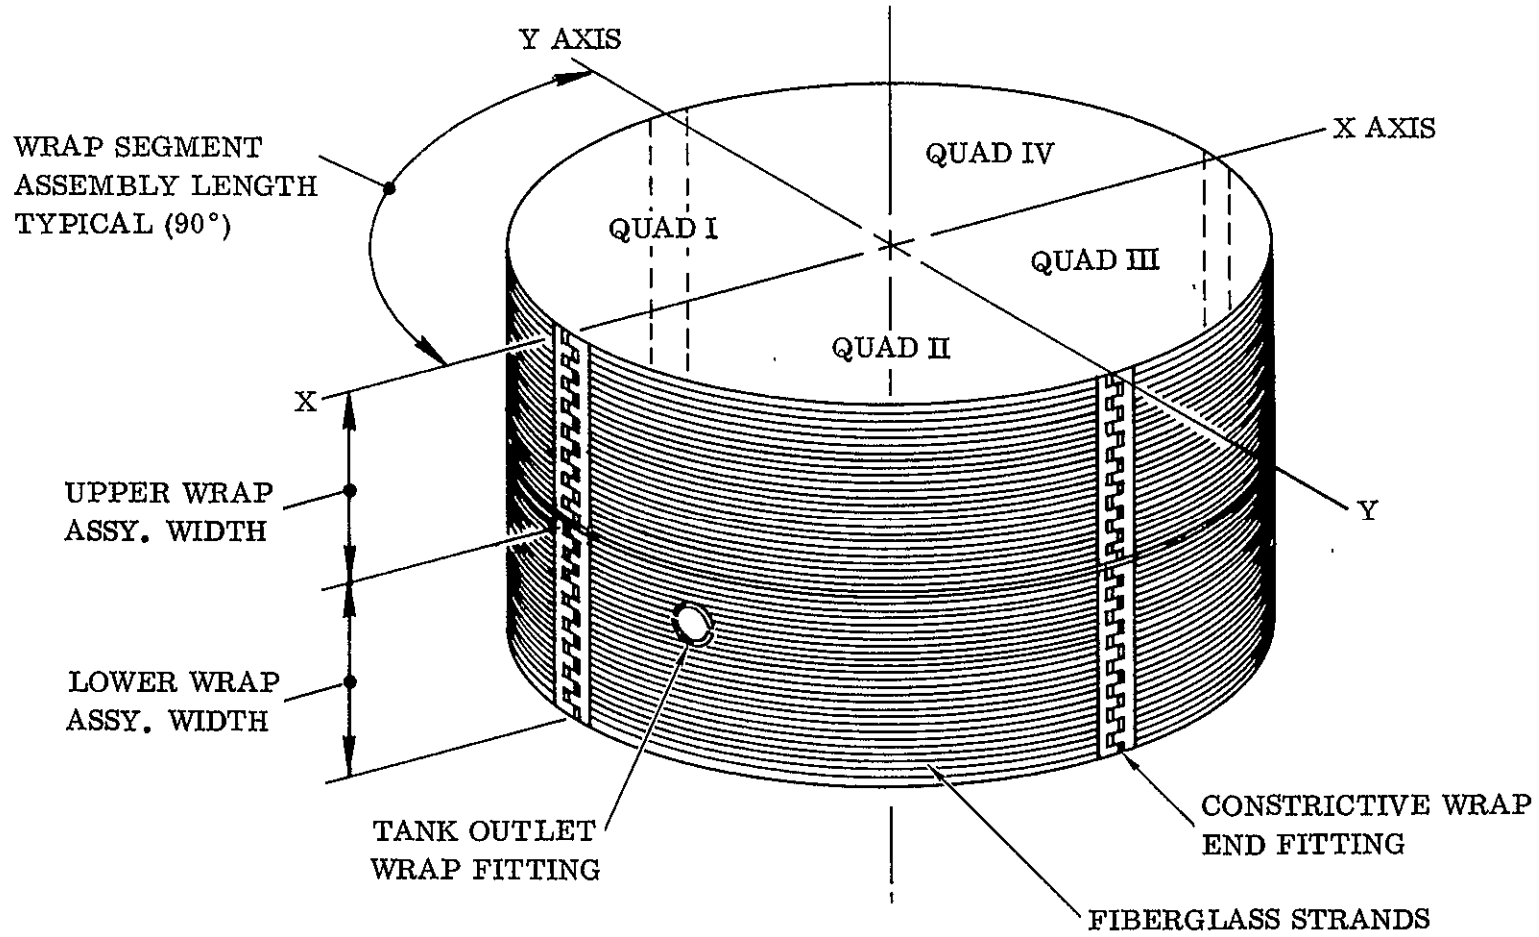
T-9 Test Tank Constrictive Wrap Configuration
